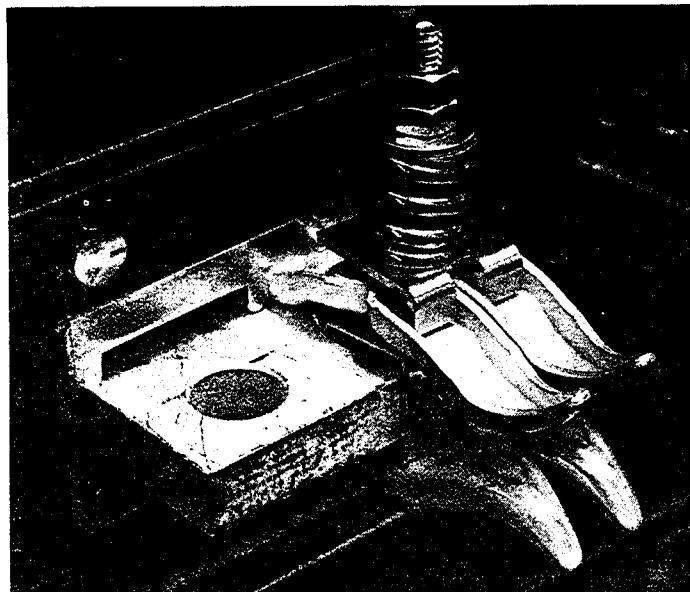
PRIMARY DISCONNECT ASSEMBLY
